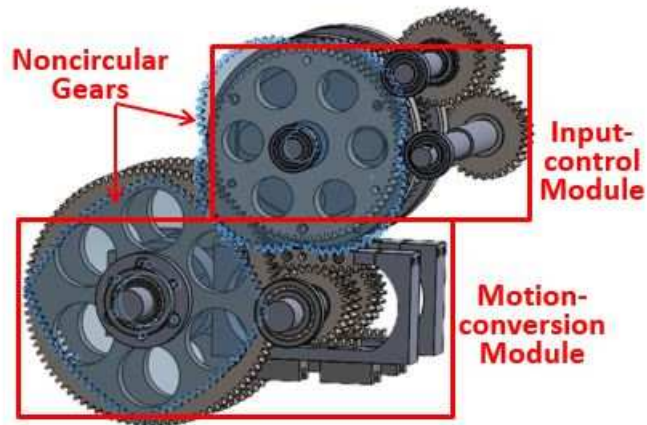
Layout of a variant of the SGIVT; two highlighted transparent gears are noncircular gears, parts on three shafts in the top layer constitute the input-control module, and parts on two shafts in the bottom layer constitute the motion-conversion module.
